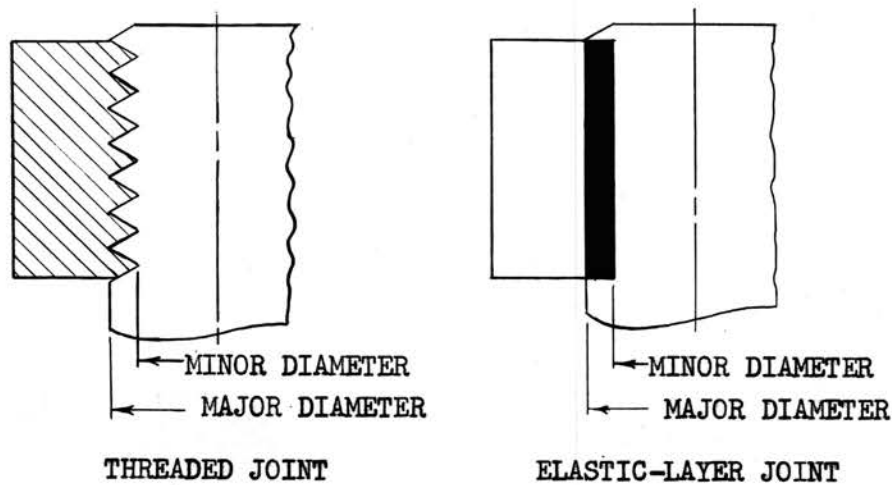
Cross-sectional views of the actual threaded joint and the hypothetical elastic-layer joint. (Courtesy of Raymond E. Chapel).²
